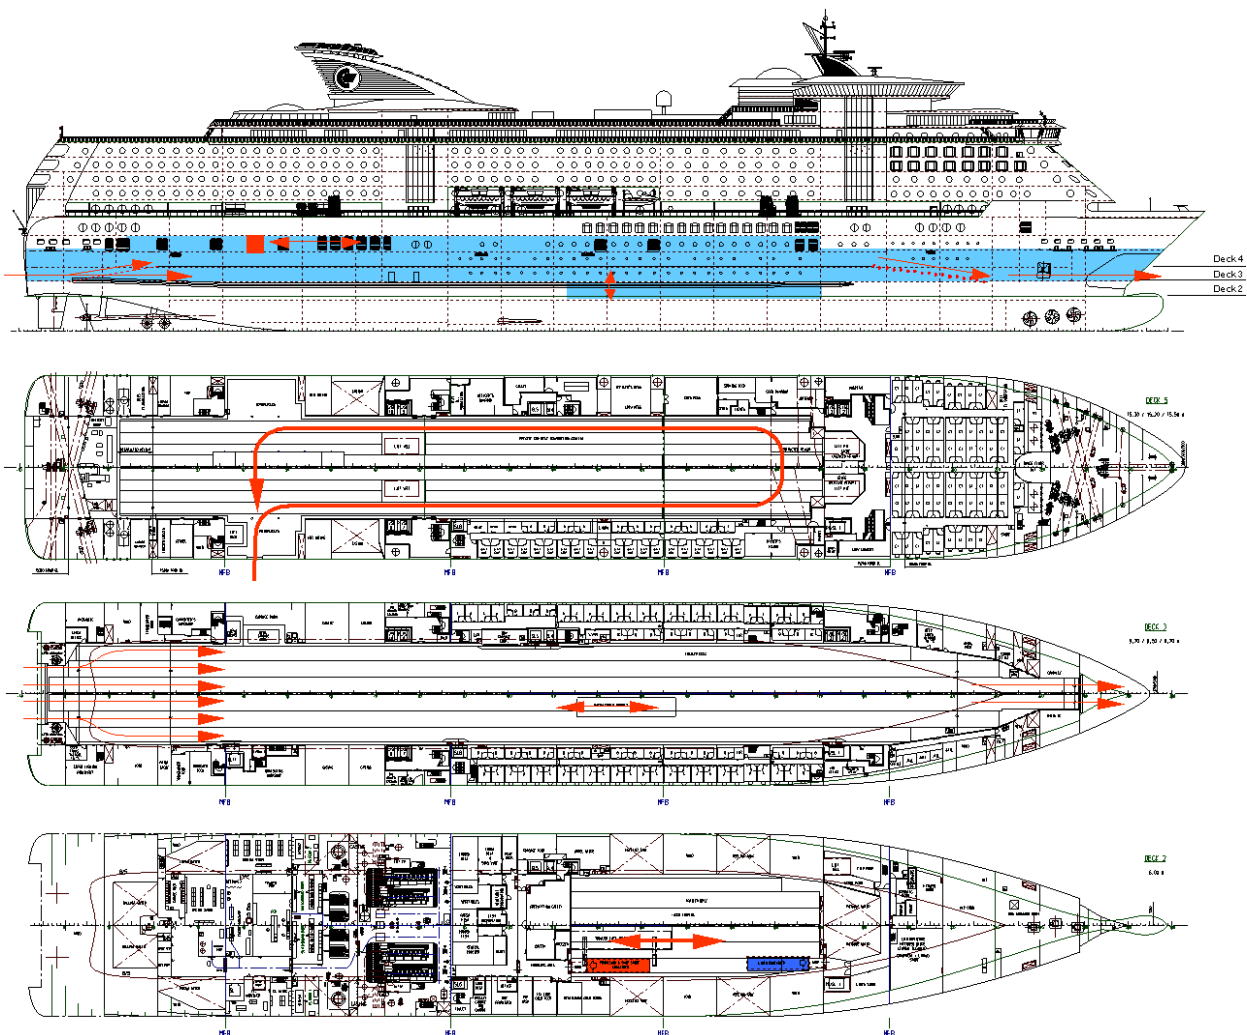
Car and cargo deck arrangement of the new Color Line cruise ferry
